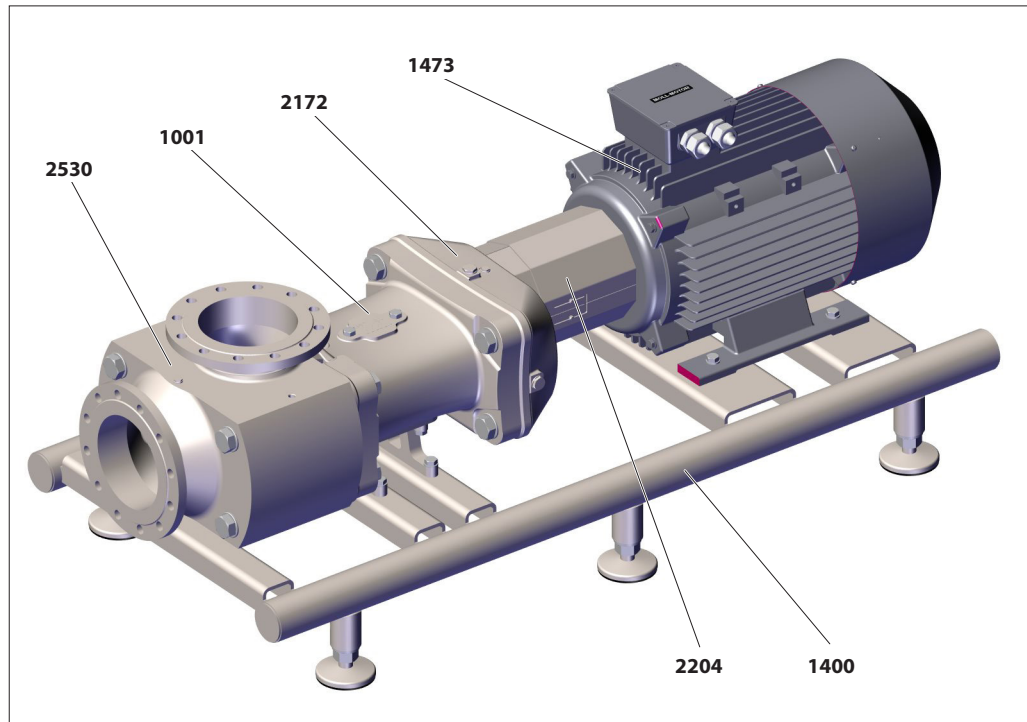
View of the WANGEN Twin NG 180 with sliding coupling protection (standard version)
